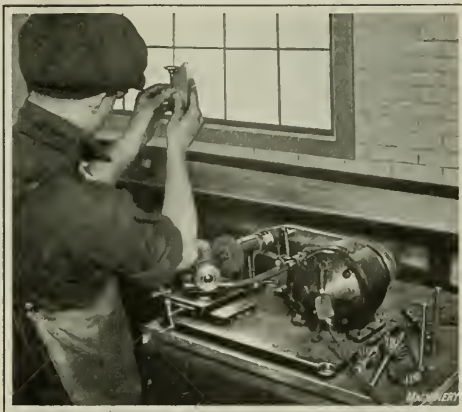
Grinding Valve Heads to reset in Exhaust and Intake Ports
